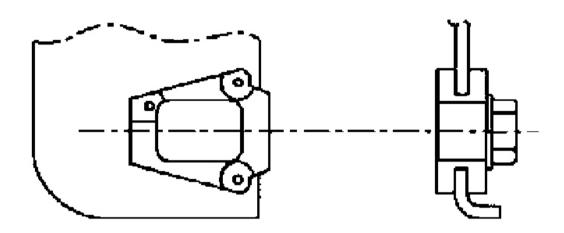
Inspecting Capsule On Steering Column Bracket Assembly Courtesy of GENERAL MOTORS CORP.
